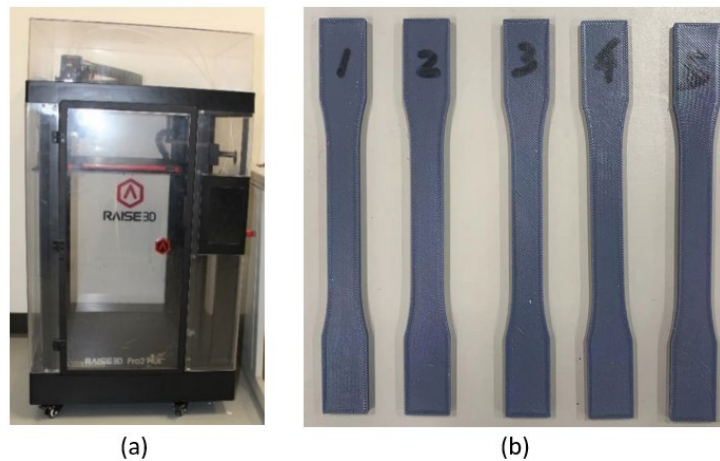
(a) Raise 3D pro2 Plus FDM 3D printer, and (b) Pure PLA filament FDM 3D printed tensile specimens [110].
